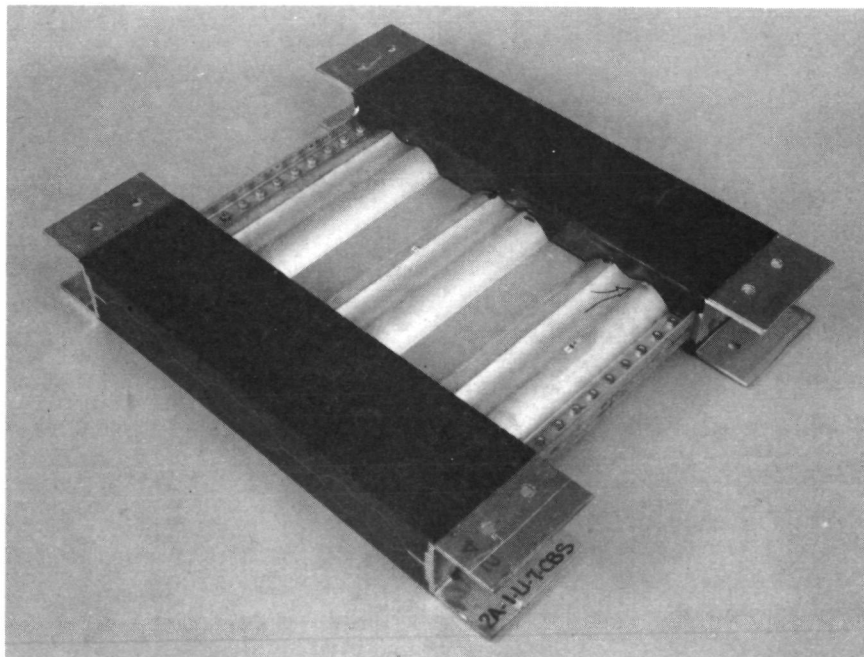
LOW LOAD FLUTED TUBE LOCAL BUCKLING TEST SPECIMEN
